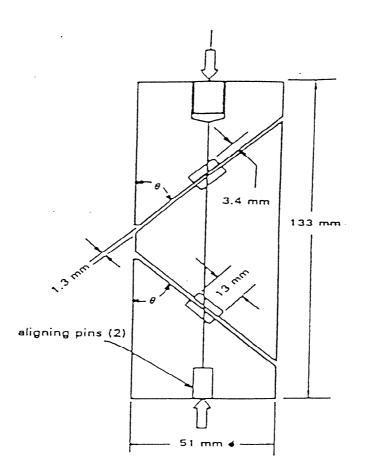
Shear/compression test fixture composed of three steel pieces. The
